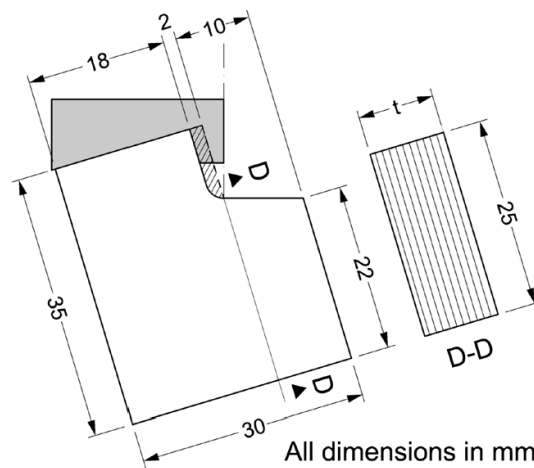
Details of the robotically fabricated shear specimen and matching jig holding piece
